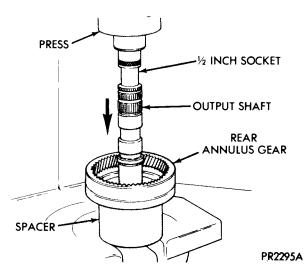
Install Output Shaft into Rear Planetary Annulus Gear
